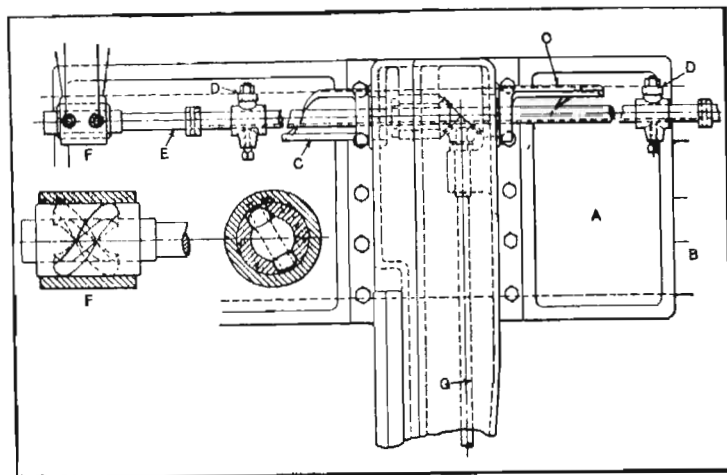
Reverse Controlling Mechanism so Arranged that Motion of Reversing Rod is Accompanied by a Rotary Movement for Feeding Tool
